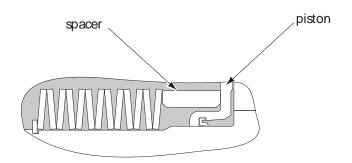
Install piston return springs. First spring with larger diameter of bevel towards wear sleeve. See Figure 106. Alternate seven (7) springs. See note Figure 56.
